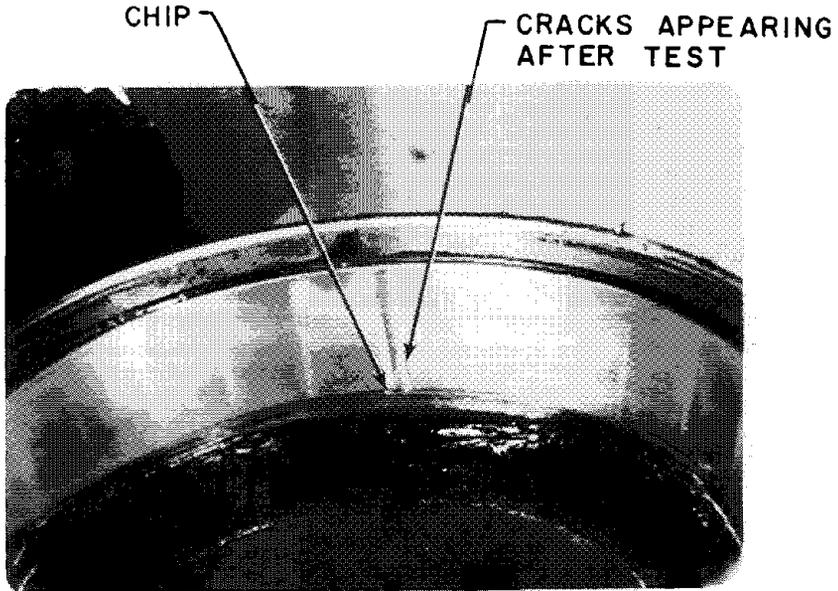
BEARING FP-11 SHOWING INBOARD END CRACK PROPAGATION
